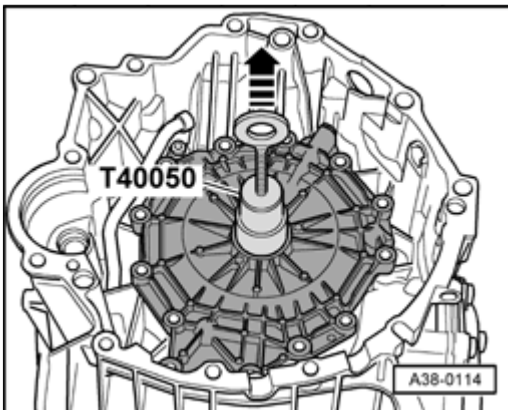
Securing Puller T40050 On Transmission Input Shaft
